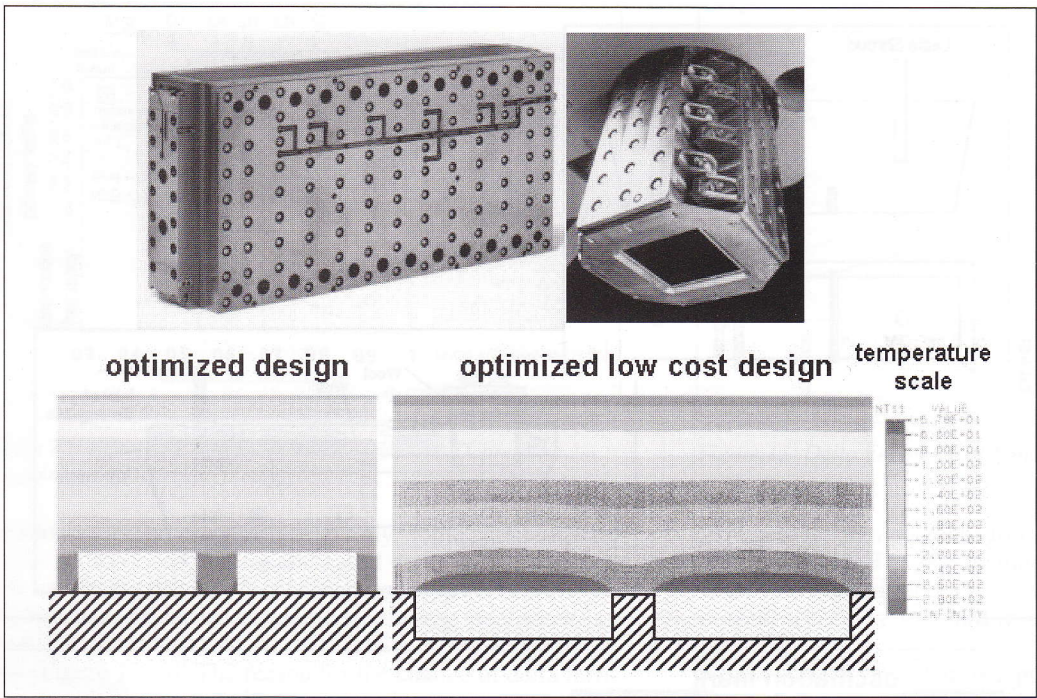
Advanced Cassette-Type Mold Copper Plates.
